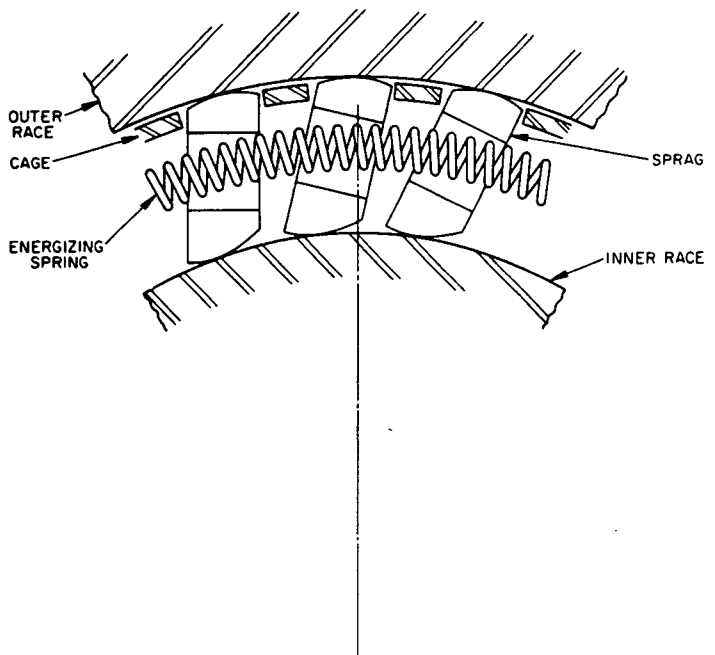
TYPICAL SINGLE-CAGE ONE-WAY CLUTCH DIAGRAM
